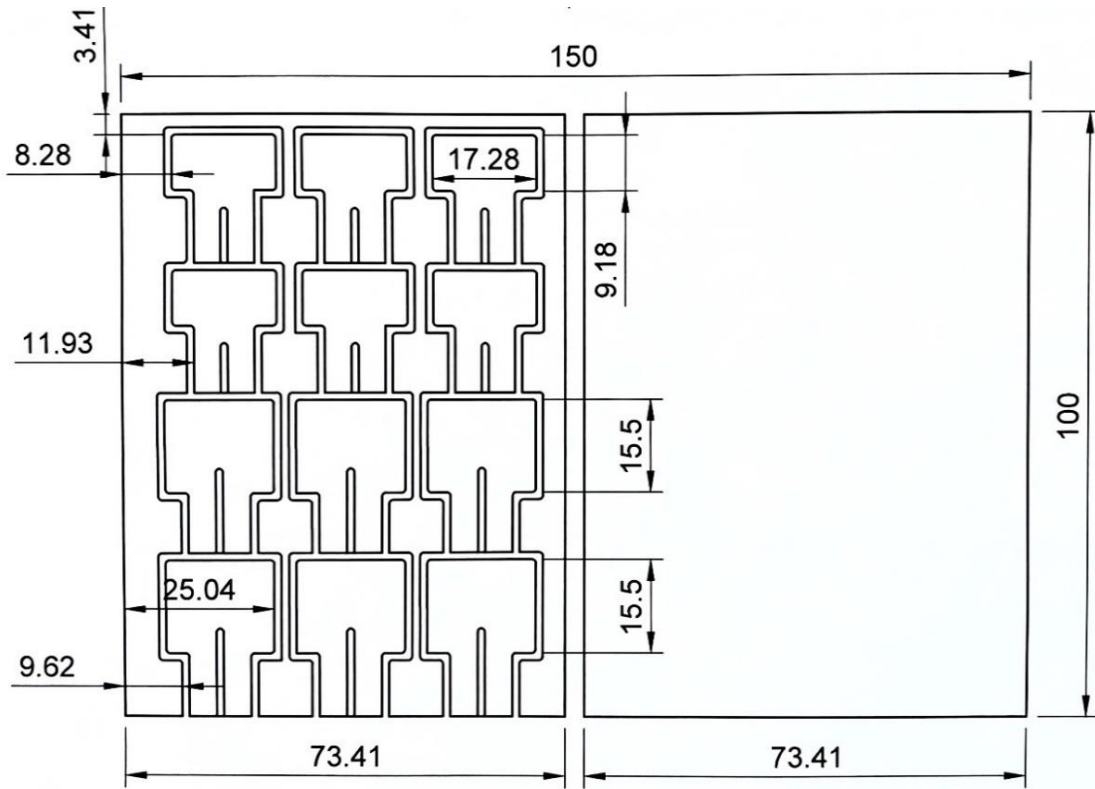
Fusion360 layout for CNC machine to cut individual PCBs
